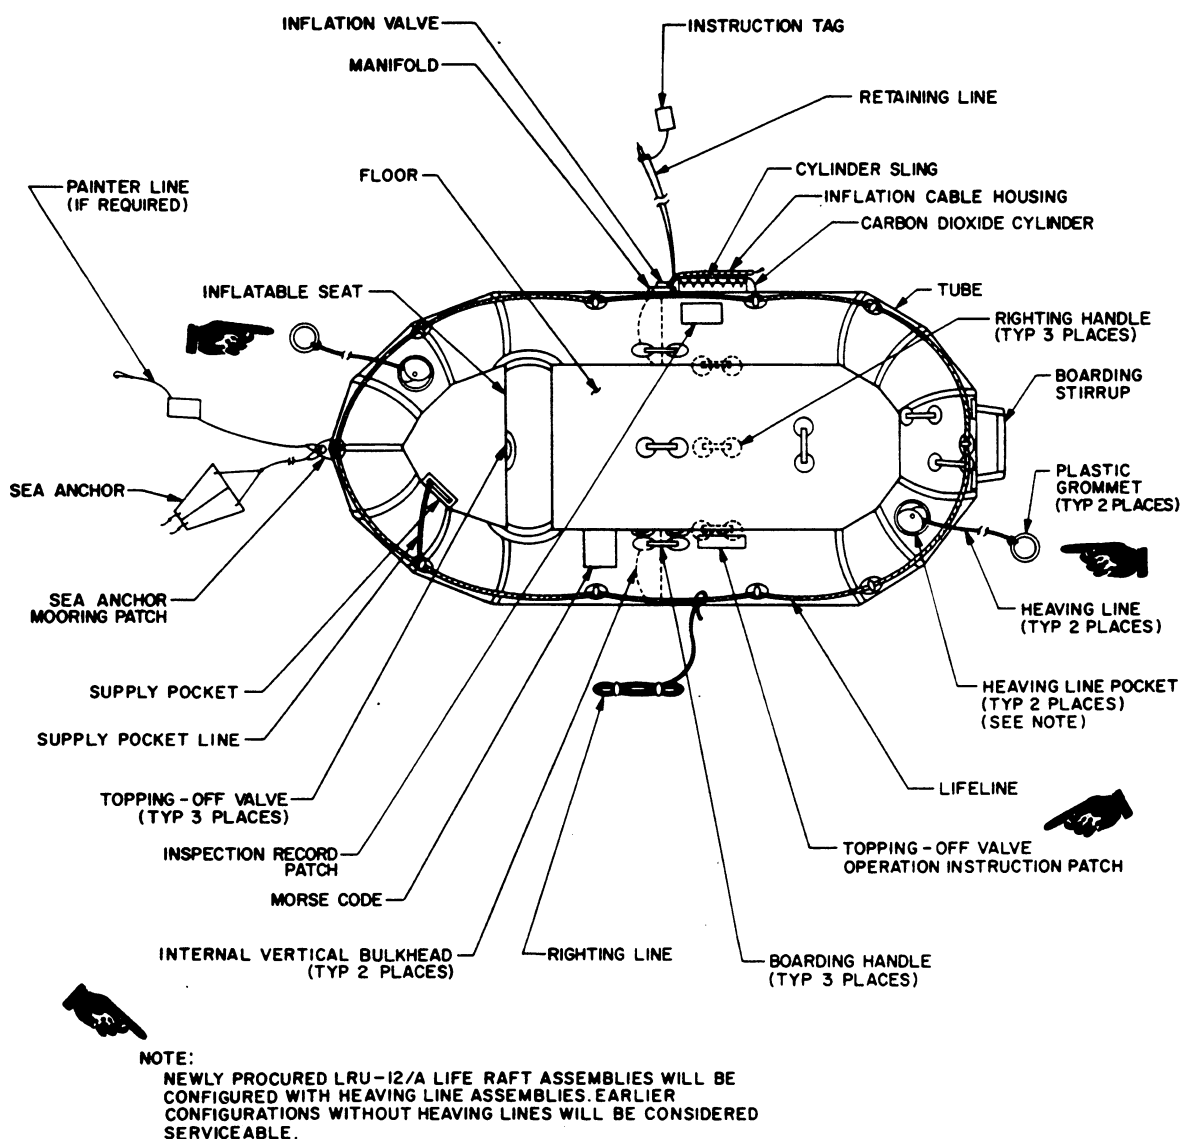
LR-1 life raft assembly parts nomenclature.
